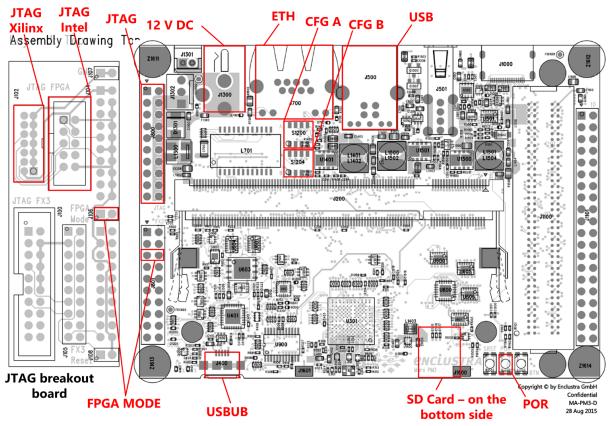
Mars PM3 Base Board Assembly Drawing (Top View)
